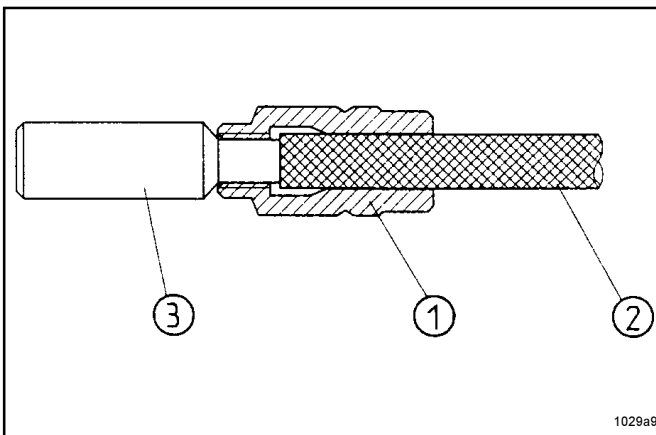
Preassembly of the threaded sleeve by means of an adjusting gauge
